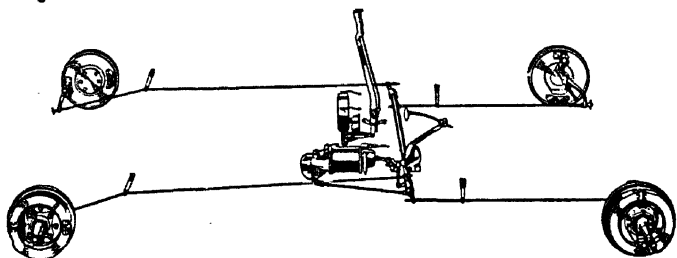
Vacuum Servo Brakes used on Small Cars.
